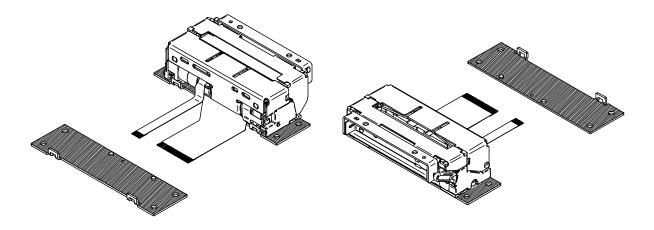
Sample for Positioning and Securing the Printer Main Body (2) (Fixed by the Mounting Part a, a', c and c')
